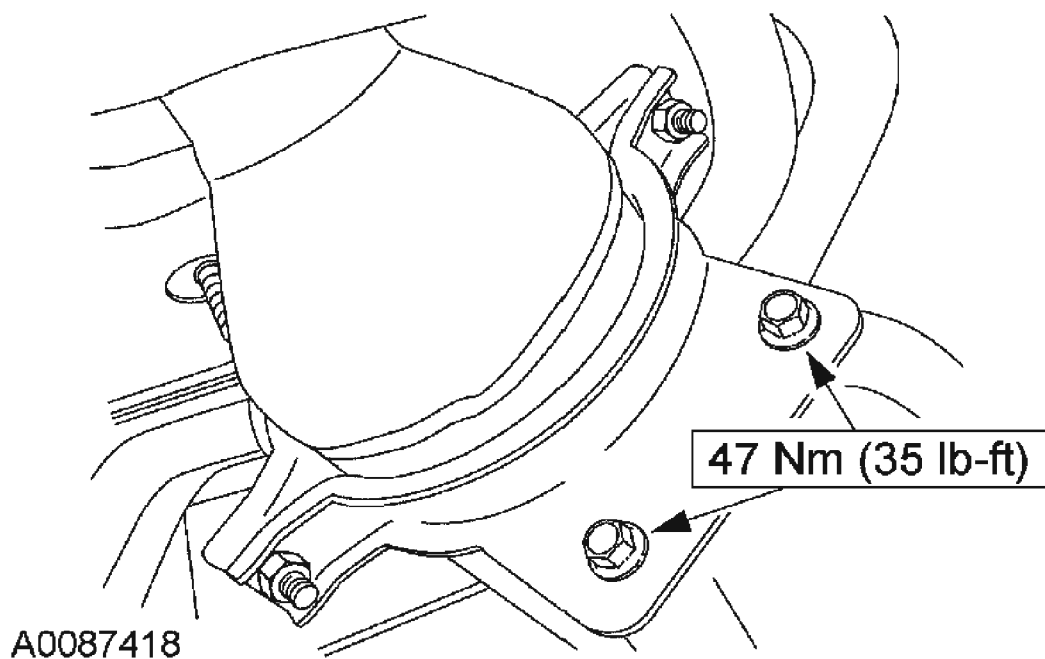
Removing Bolts And Support Bracket (2 Of 2)
